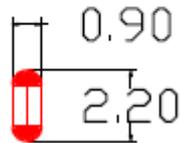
PAD BOTTOM VIEW (Unit: mm)
